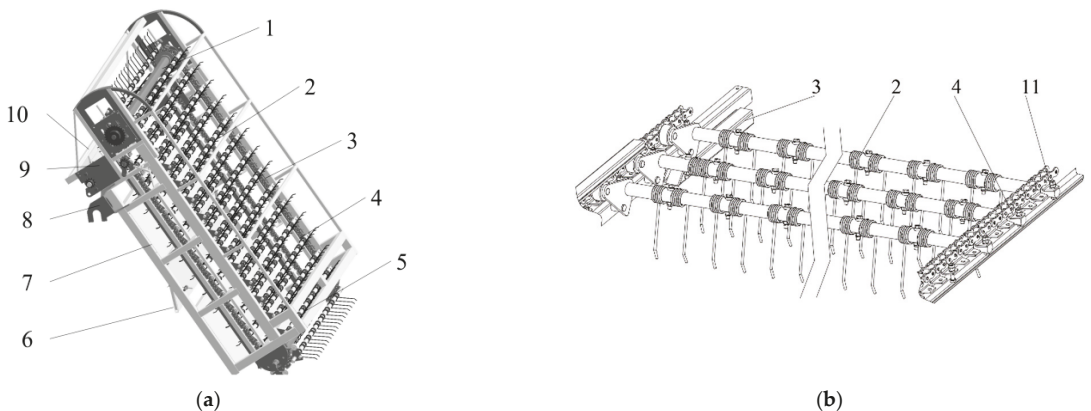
Hook-and-tooth chain rail type film picking device: 1. Chained rake frame upper shaft assembly; 2. Hook tooth assembly; 3. Guide beam; 4. Curved edge conveyor chain; 5. Chain rake frame lower shaft assembly; 6. Flap for discharging debris; 7. Chain rake frame; 8. Mounting plate; 9. De-filming shaft; 10. Prevention of mulch sucking back parts; 11. Articulated short shaft. (a) the main components of the picking device, (b) Pick up film chain rake structure schematic diagram.
